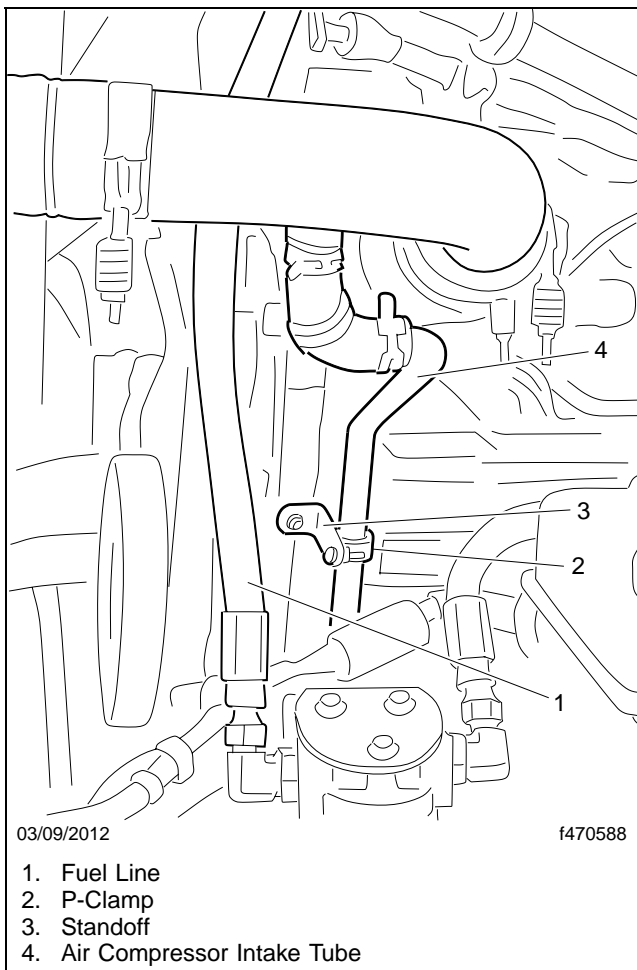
, Correct Air Compressor Intake Tube Assembly Installation
